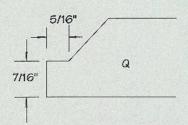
Make an additional 45° cut where the lower side trim meets the front trim.
